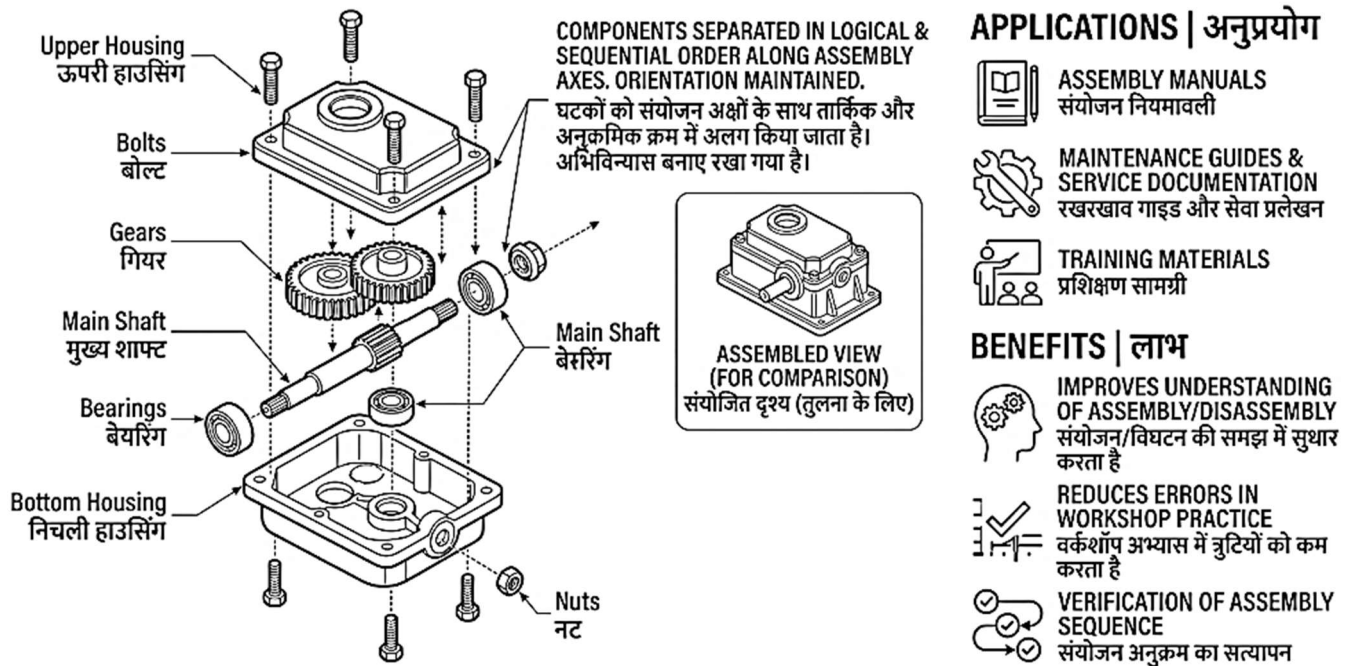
Exploded View - Concept and Applications | विस्फोटित दृश्य - अवधारणा और अनुप्रयोग
